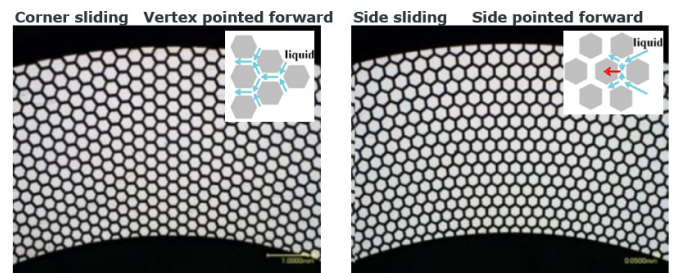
Prototype test pieces directionally aligned (Left: CS; right: SS)
